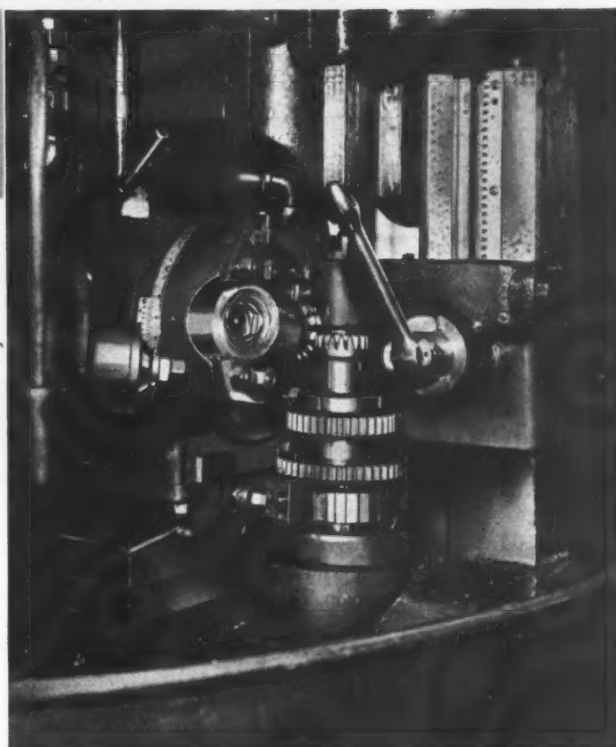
Two Seventeen-tooth Gears—One on the Countershaft Cluster and the Other on the Drive Gear—are Cut on Alternate Spindles of This Hobbing Machine
